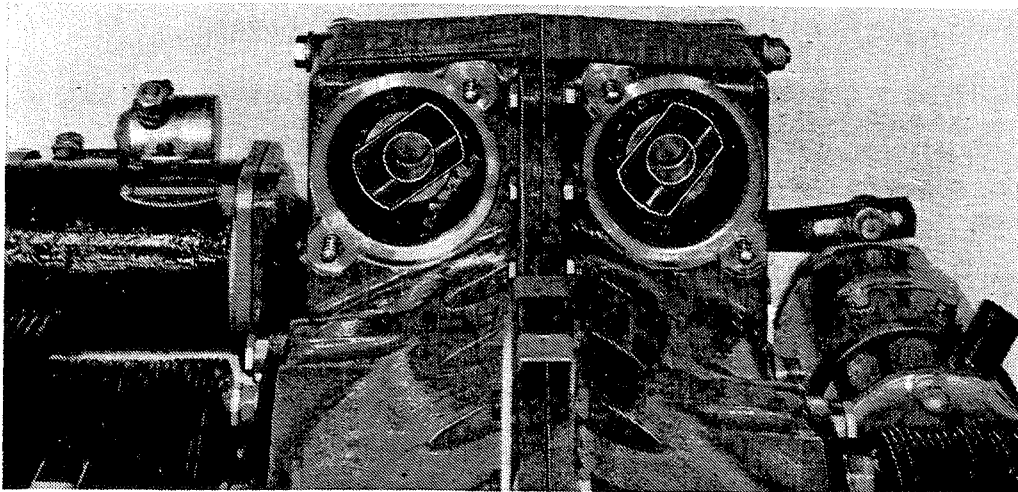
POSITION OF MAGNETO COUPLINGS.
